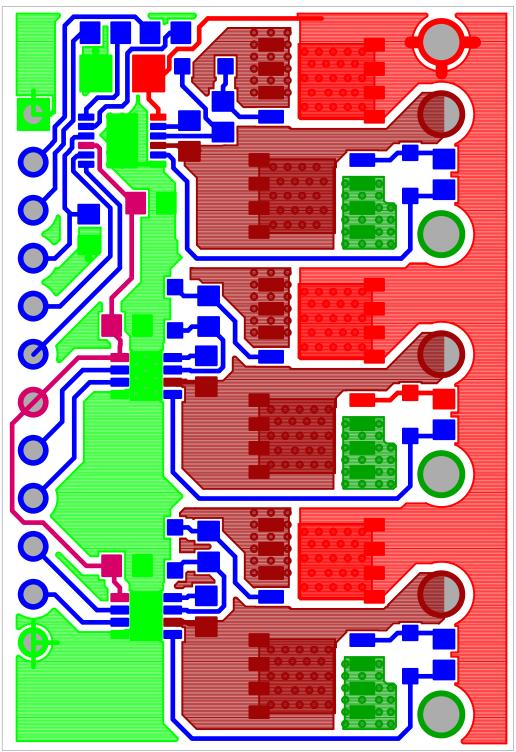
PCB, LAYER 1, COMPONENT SIDE
